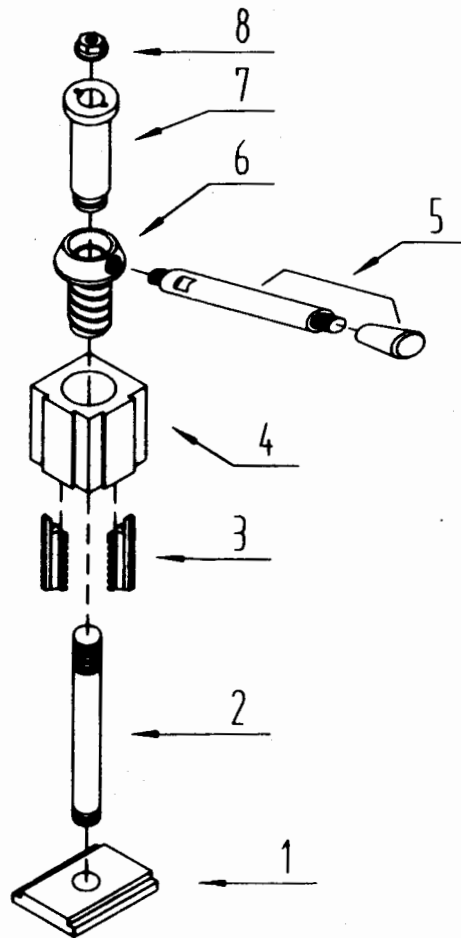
Replacement Parts illustration for Wedge Type Tool Post
